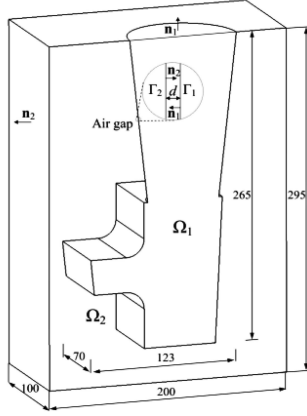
Scheme of the casting-mould system (dimensions in mm).
